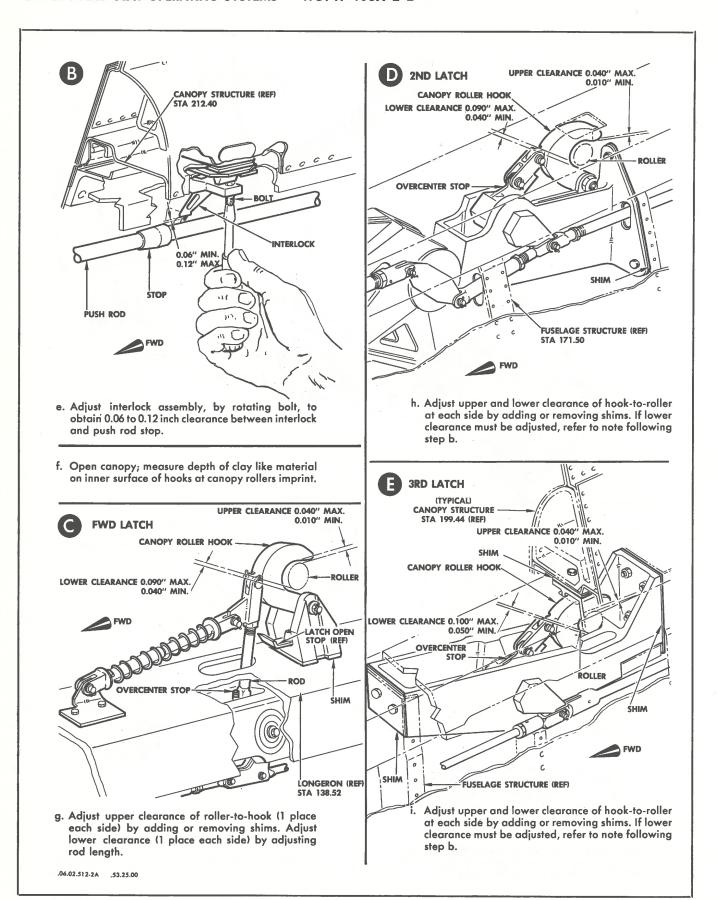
Canopy Latch Adjustment, F-106B (Sheet 2 of 3)
